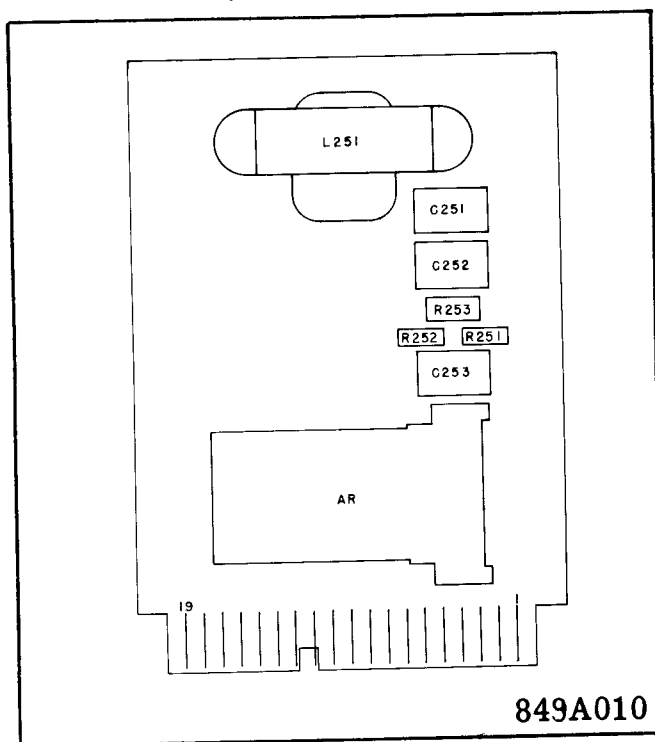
Component Location on Relay Printed Circuit Board with an AR Output for Type SKBU Relay
